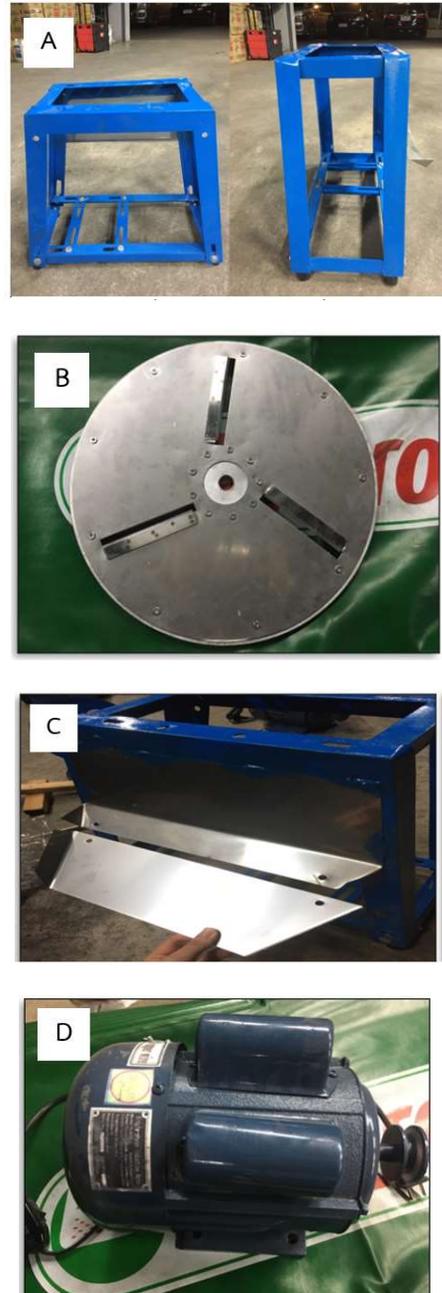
Main components of durian flesh slicing machine. (A) Machine structure (B) Blade (C) Supporting tray (D) Motor
